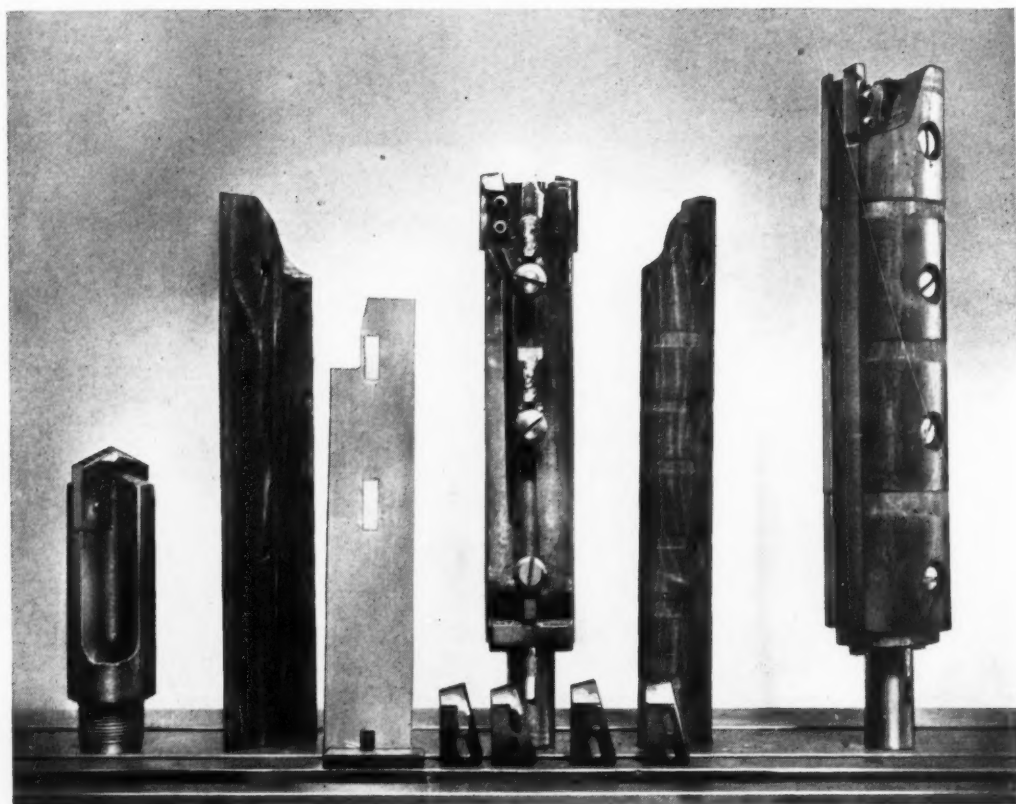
Construction of the Wood-packed Reamers Used in Machining the Bore of Gun Barrels to the Honing Size
